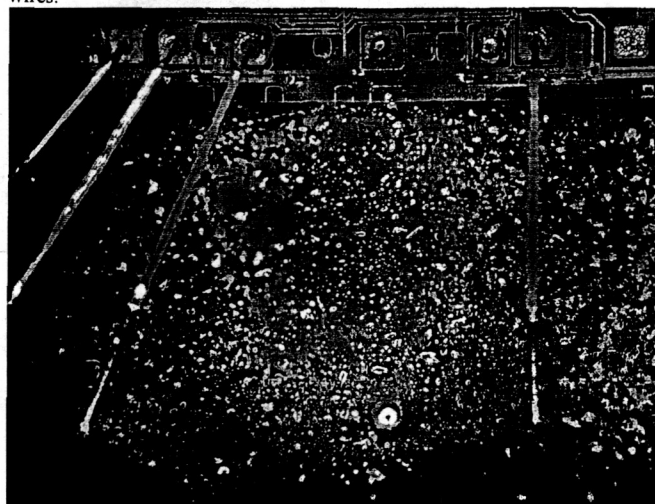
LSP2916 DUT 2 detail view of V_{LP} and Ground wires. Note the spallation of the trace as well.
